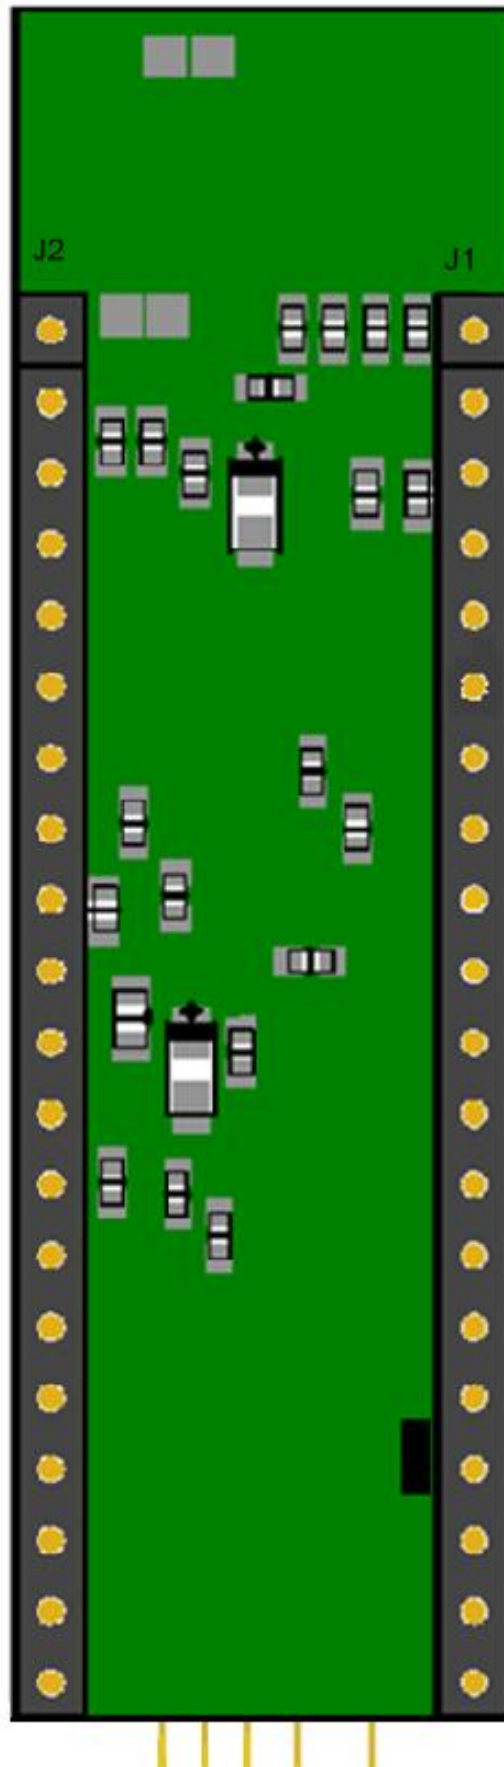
V2DIP2 48 Module Pin Out (Bottom View)
